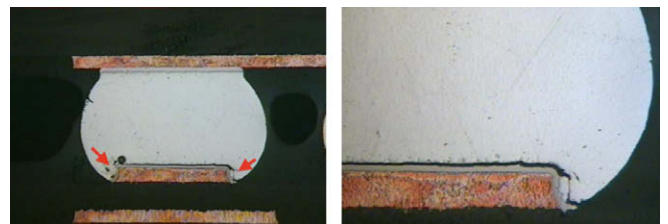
Solder joint fracture near the board side IMC layer.
